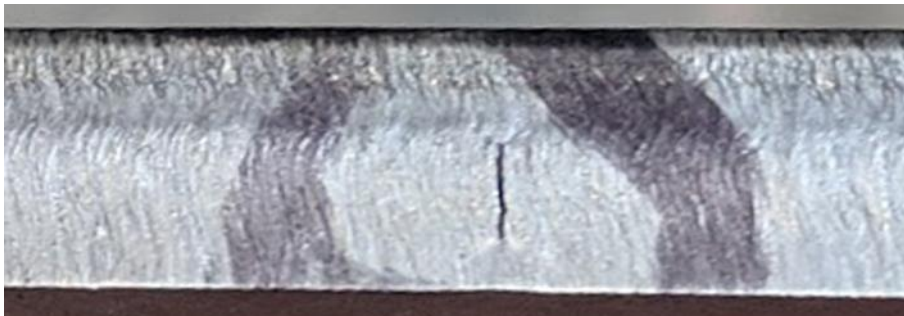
Fracture on cut surface on LF11-1-6 specimen.
